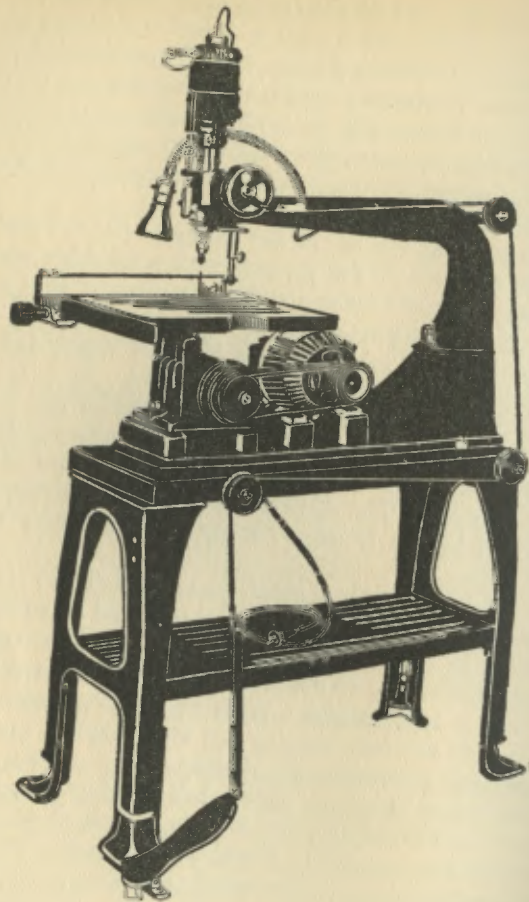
THE ROUTER ATTACHMENT FOR THE JIG SAW
